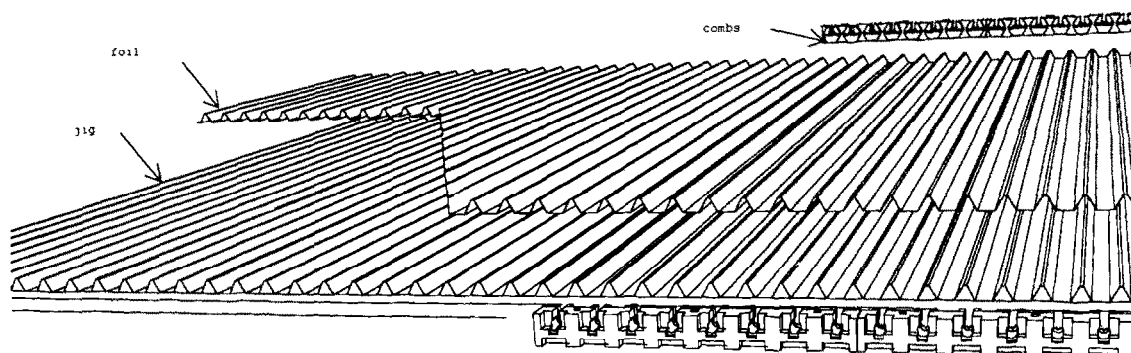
Schematic assembly of a monolayer: foil-template and end-combs are shown.
